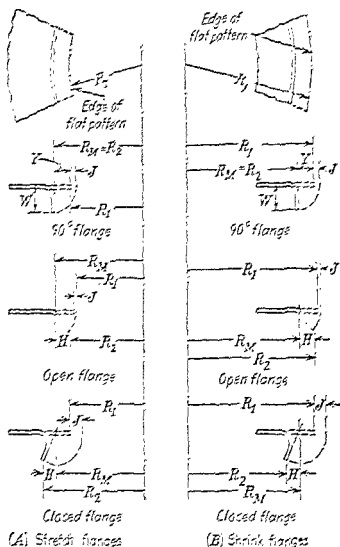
Dimensioning (A) for stretch flanges and (B) for shrink flanges. For 90° flanges use Fig. 2-13; for other flanges use Fig. 2-19.
